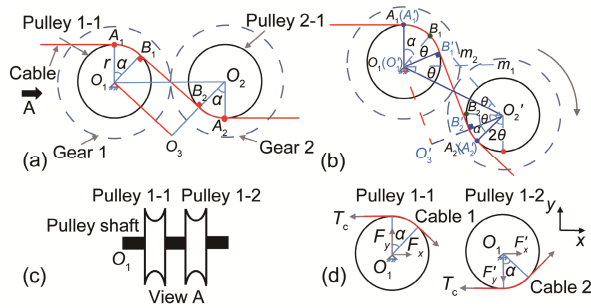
A section view of the pulley assembly, composed of four pulleys (pulleys 1-1, 1-2, 2-1, 2-2) and two gears (gears 1, 2) (a), kinematic analysis after gear 2 is rotated around gear 1 with an angle θ clockwise (b), partial view from view A (c), and the force analysis of pulleys 1-1 and 1-2 (d)
